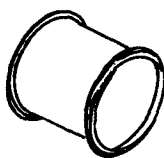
Mark 13 middle inner structure, shell-to-shell and flange-to-shell butt welds
